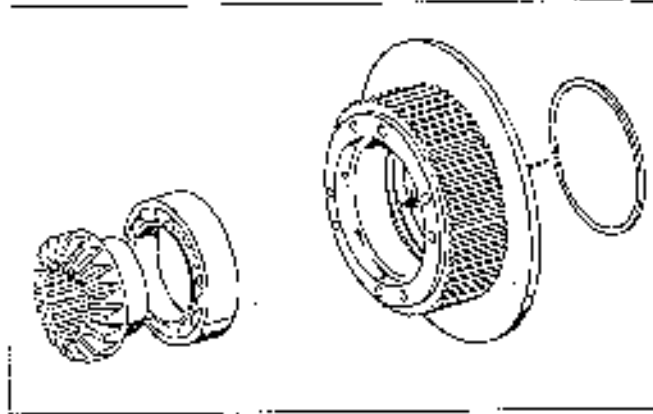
Reverse Clutch Flange, Roller Bearing and Bevel Gear (snap ring in HP clutches only; location arrow applies only to clutch no. 1-00100-2419 and 1-00100-2420).
